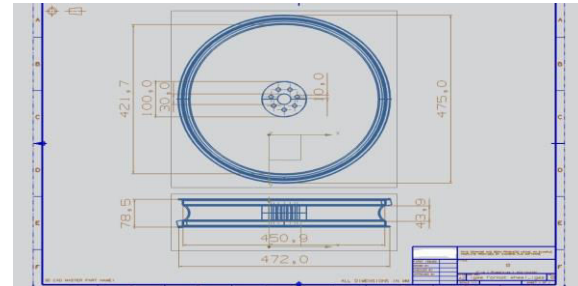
2D Drawing dimensions are in mm Drafting Views
